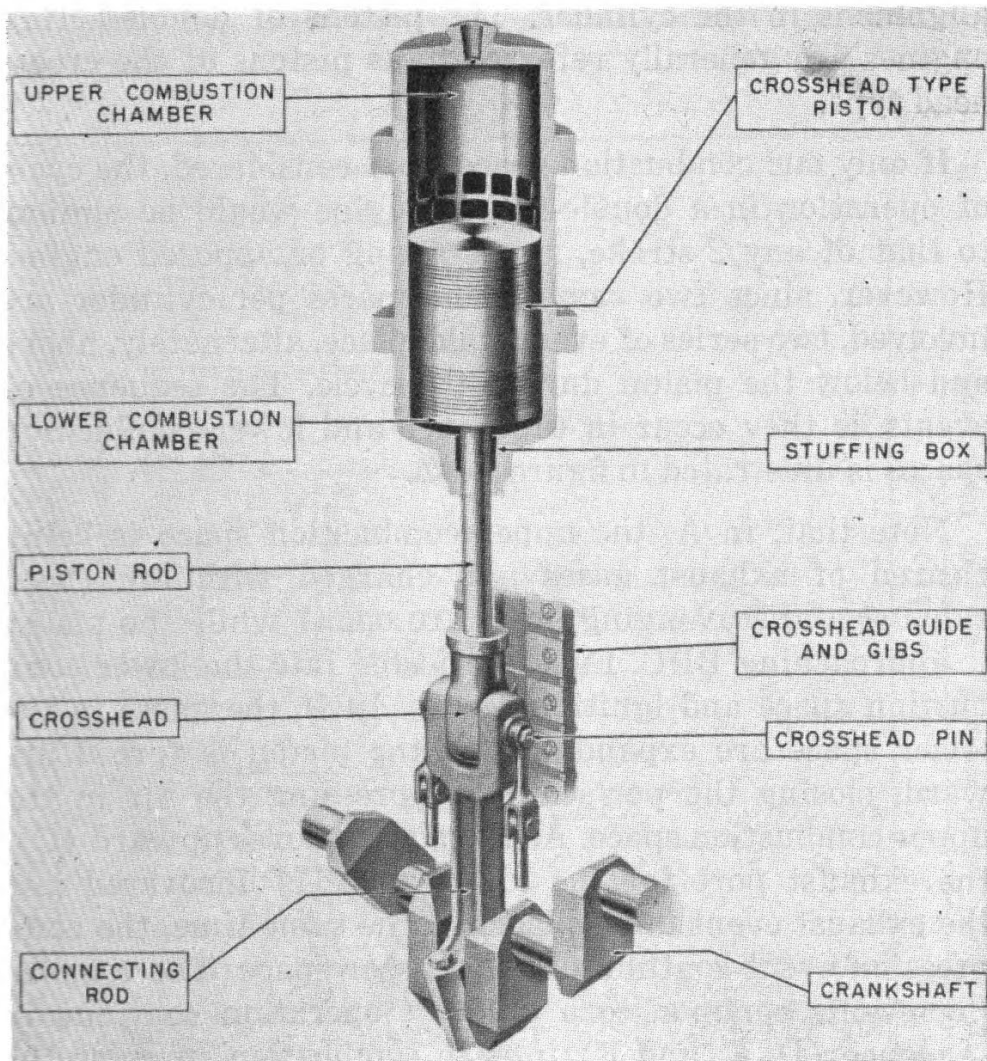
Cylinder and related parts for a double-acting engine.
